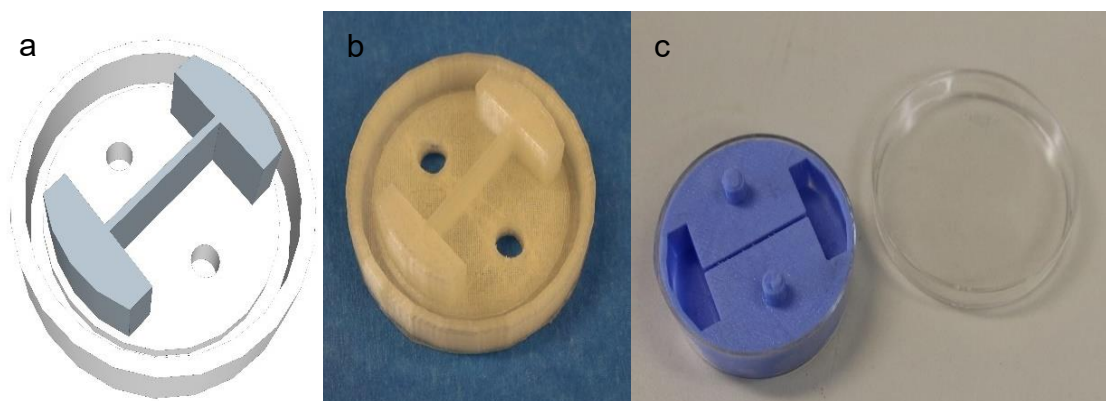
Second PLA mould design, 3D printed PLA mould and silicone cast. a) CAD design created in Google Sketch Up (64 bit) 2017 for the PLA mould. b) 3D printed PLA mould printed using Ultimaker 3 extended. c) Silicone cast created from the 3D printed PLA mould. Results representative of the production of 3 silicone casts.
